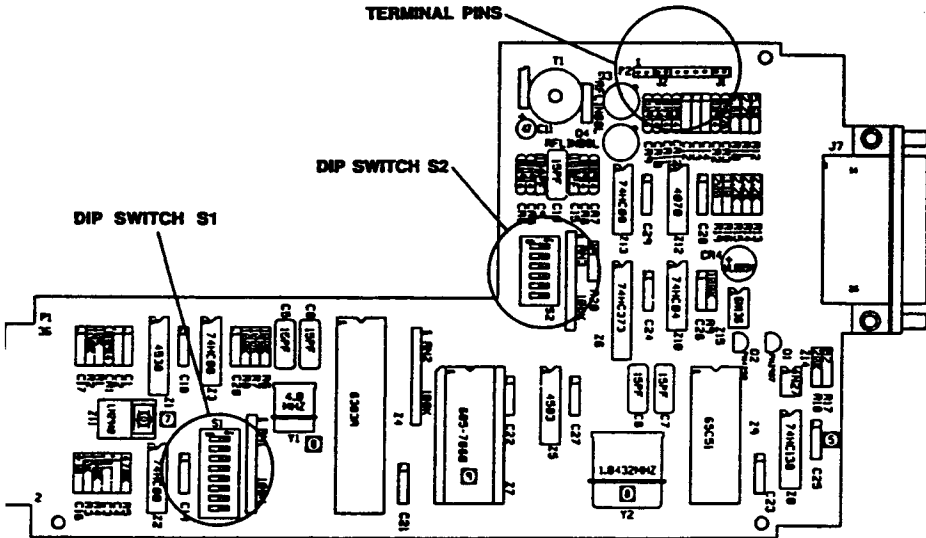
TERMINAL PINS AND DIP SWITCHES, SERIAL OUTPUT CARD
